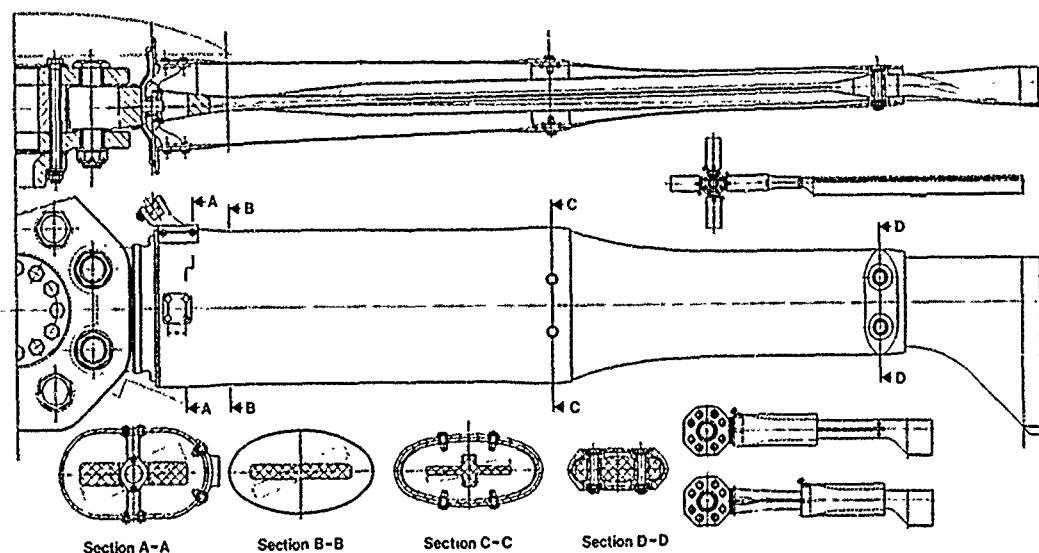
Composite bearingless main rotor design with flexural single beam element and control tube
